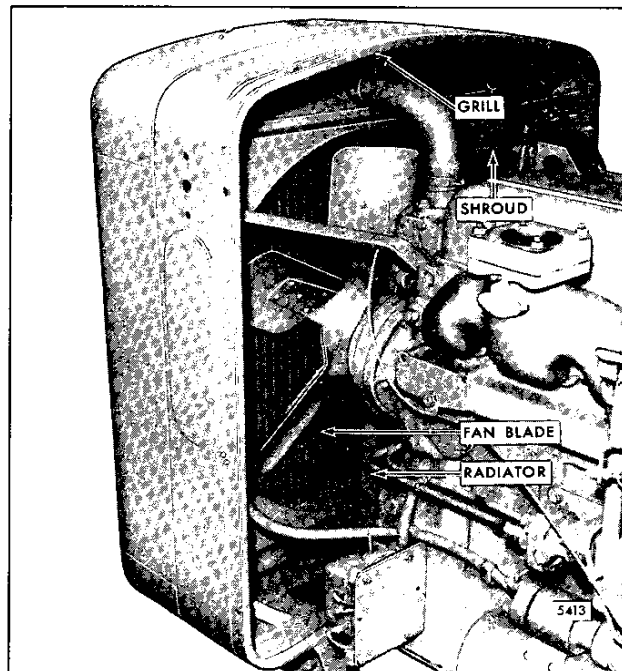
Typical Radiator Mounting (In-Line Engine)
